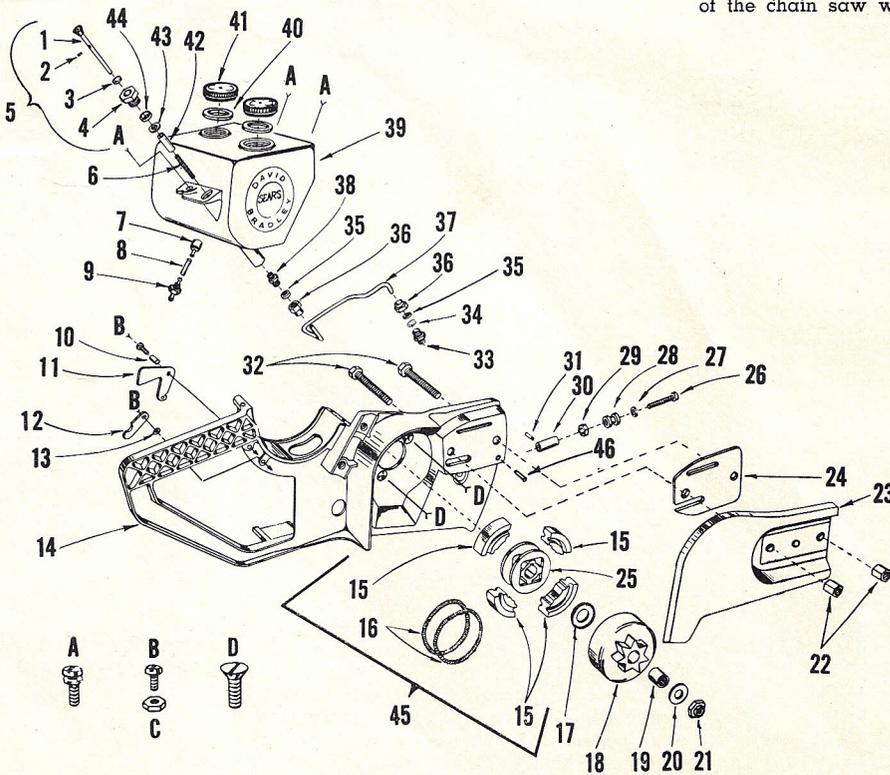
Exploded view of tank frame and related part of a typical direct drive model.
